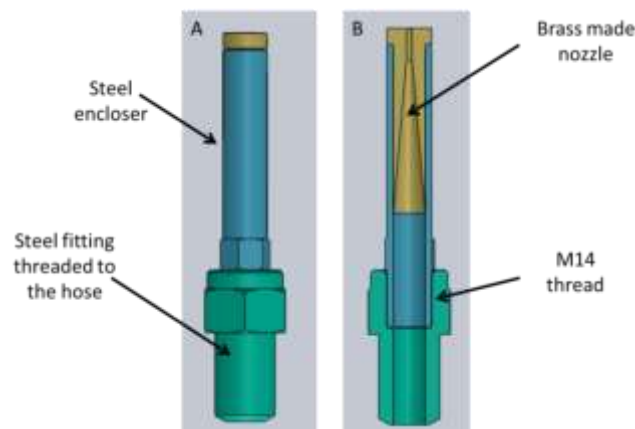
Updated design of external cryogenic cooling nozzle. A) Front view, B) Section view
